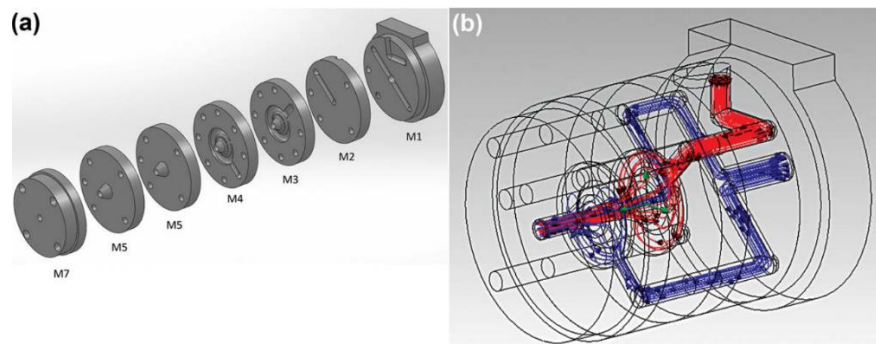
Schematic representation of co-extrusion die, (a. exploded view, b. material streamlines view)
